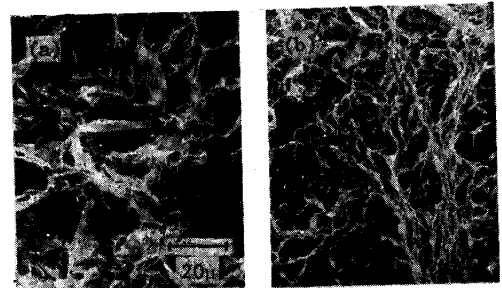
Fracture surface of Charpy testpieces, showing boron addition is effective in reducing an intergranular fracture; (a) Boron-free steel, (b) Boron steel.
